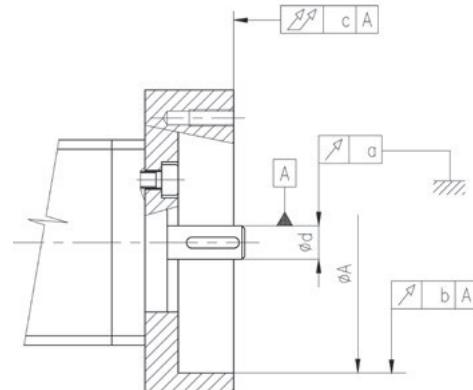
Tolerances of M series connecting parts
